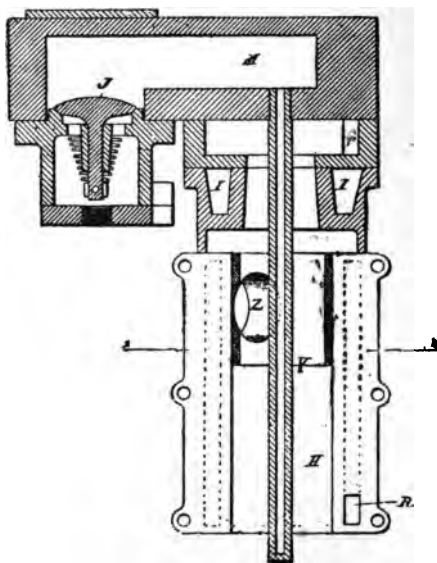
Roots' Air Heater for Petroleum or Explosive Engine.
